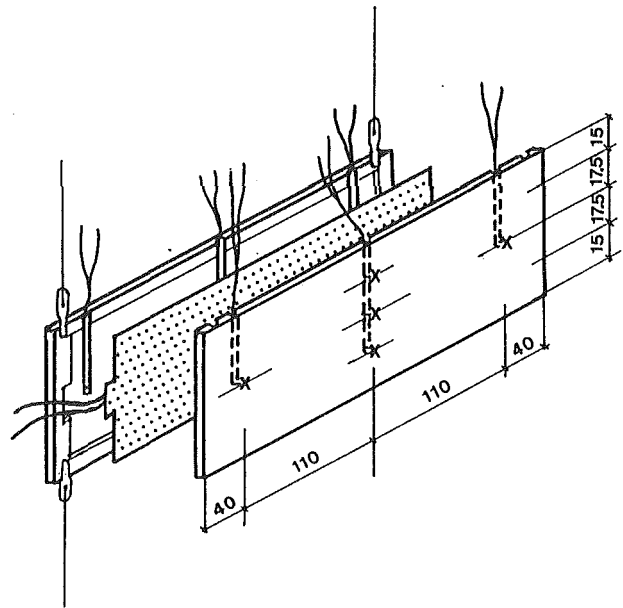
Detail of the housing of electrical heater and thermocouples (X) in the plate (all dimensions are in mm)
